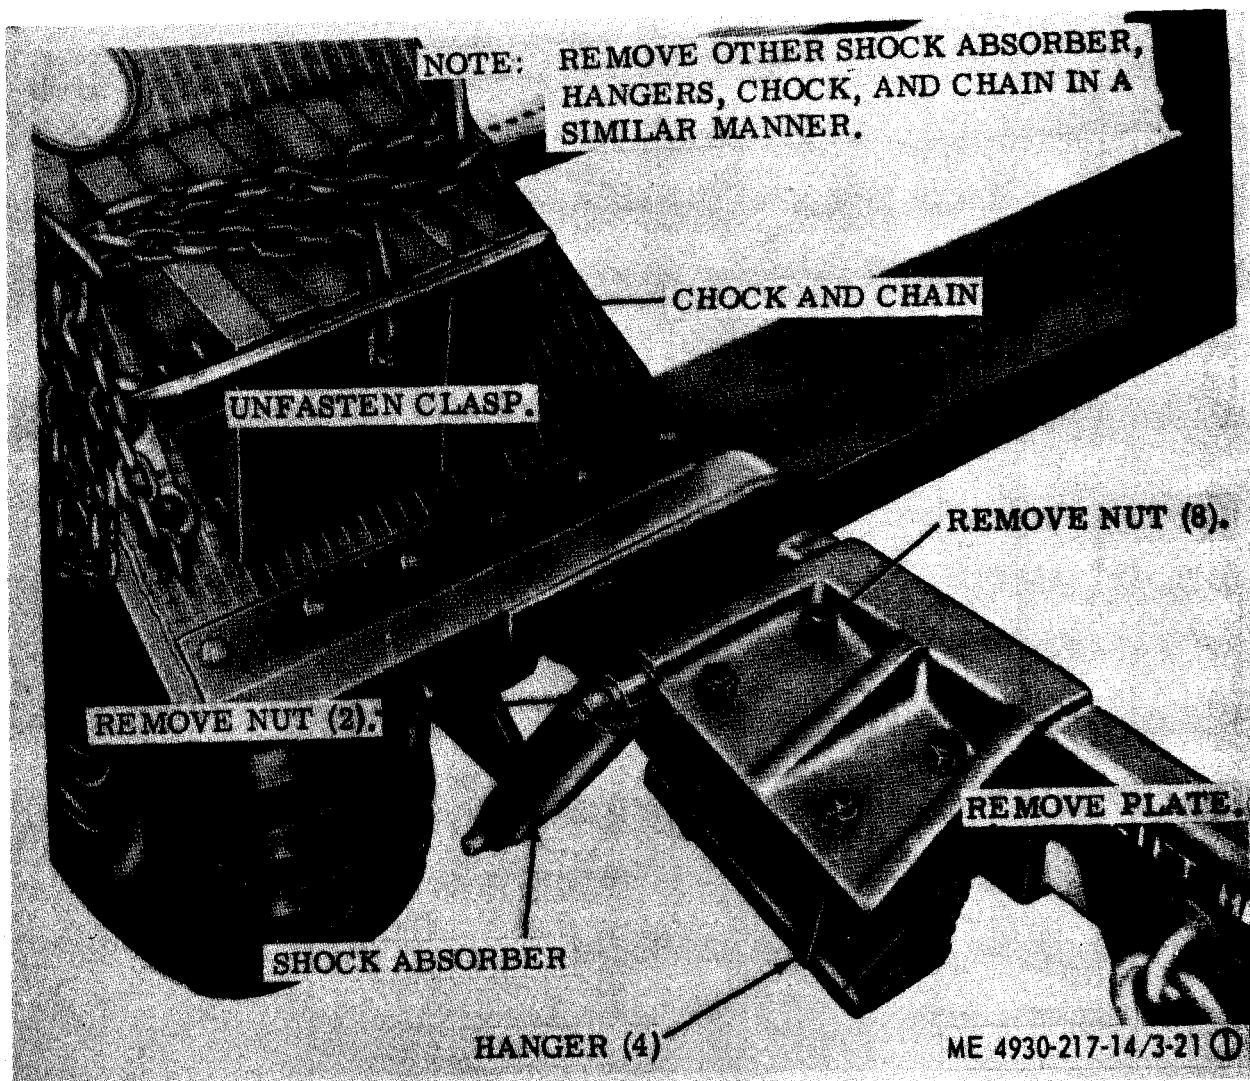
①. Shock absorbers, hangers, springs, bumper and chocks, removal and installation.
